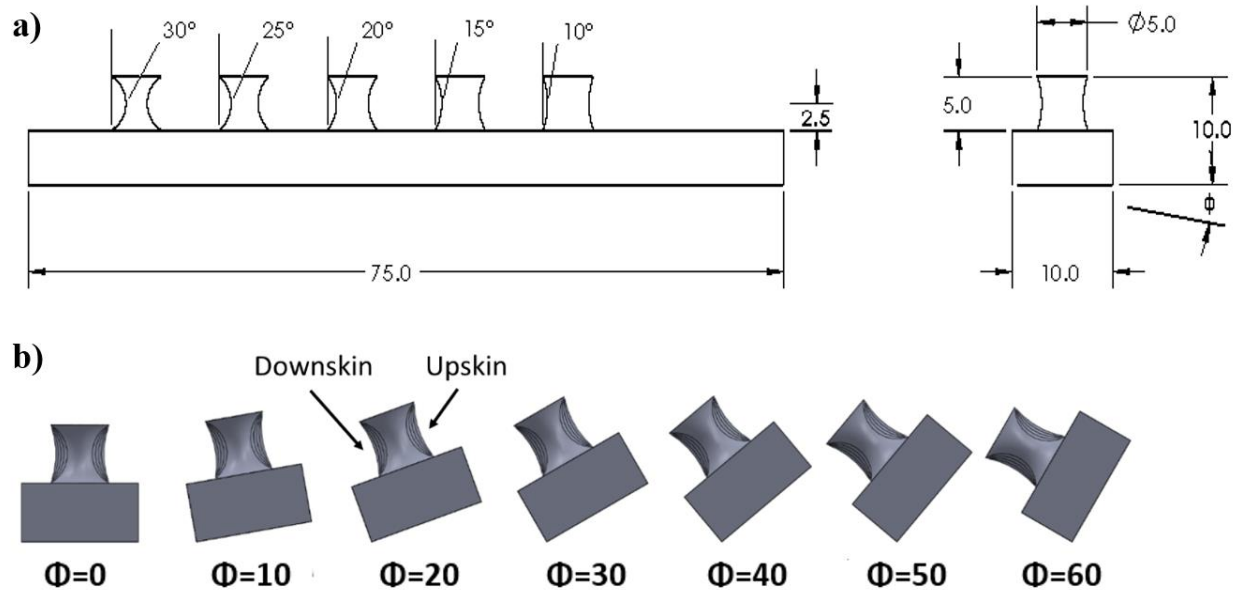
a) Specimen design including pillars with various chamfer angles; b) investigated orientation/build angles, ϕ , and upskin and downskin surface definitions. All dimensions are in millimeters.
